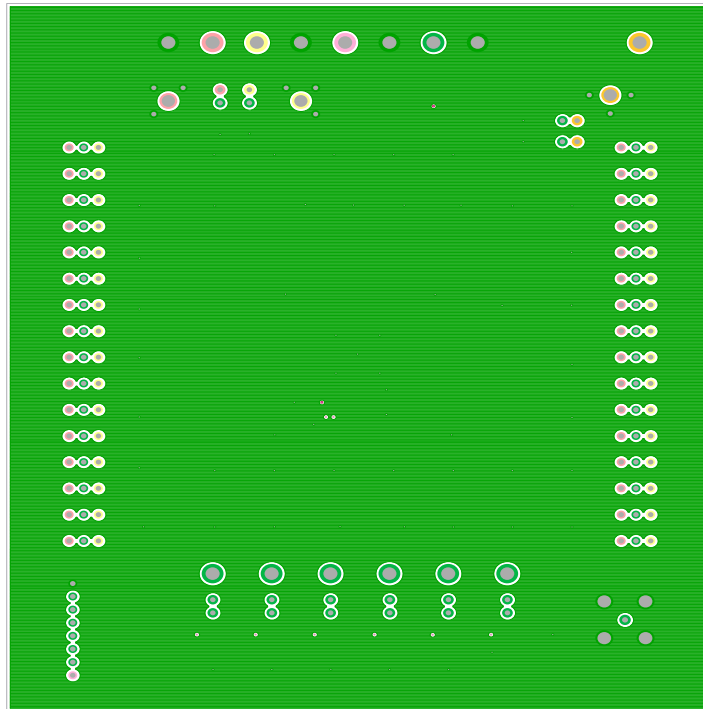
PCB - INNER LAYER 1 (TOP VIEW)
